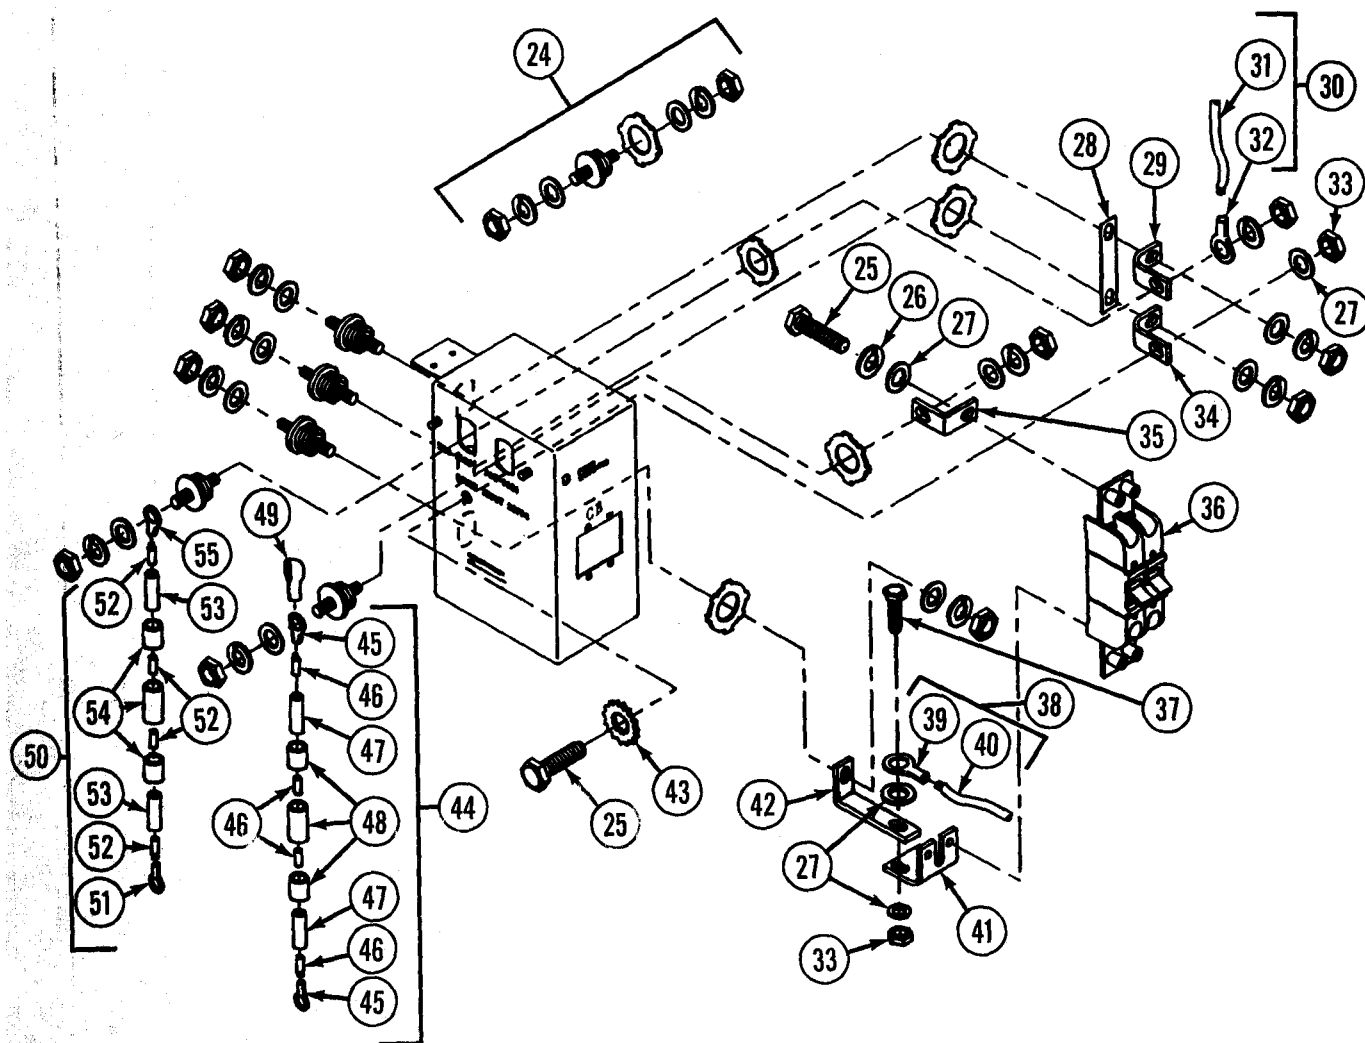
Power Interface Box Assembly (sheet 2 of 2)
